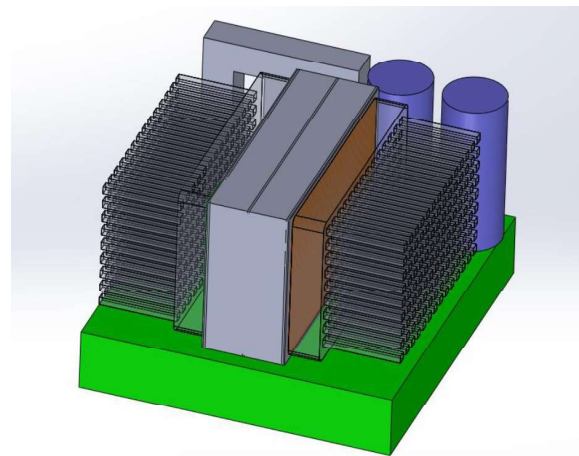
1.2kV SiC Half Bridge IPM with 3D packaging during PCB level power conversion application.
